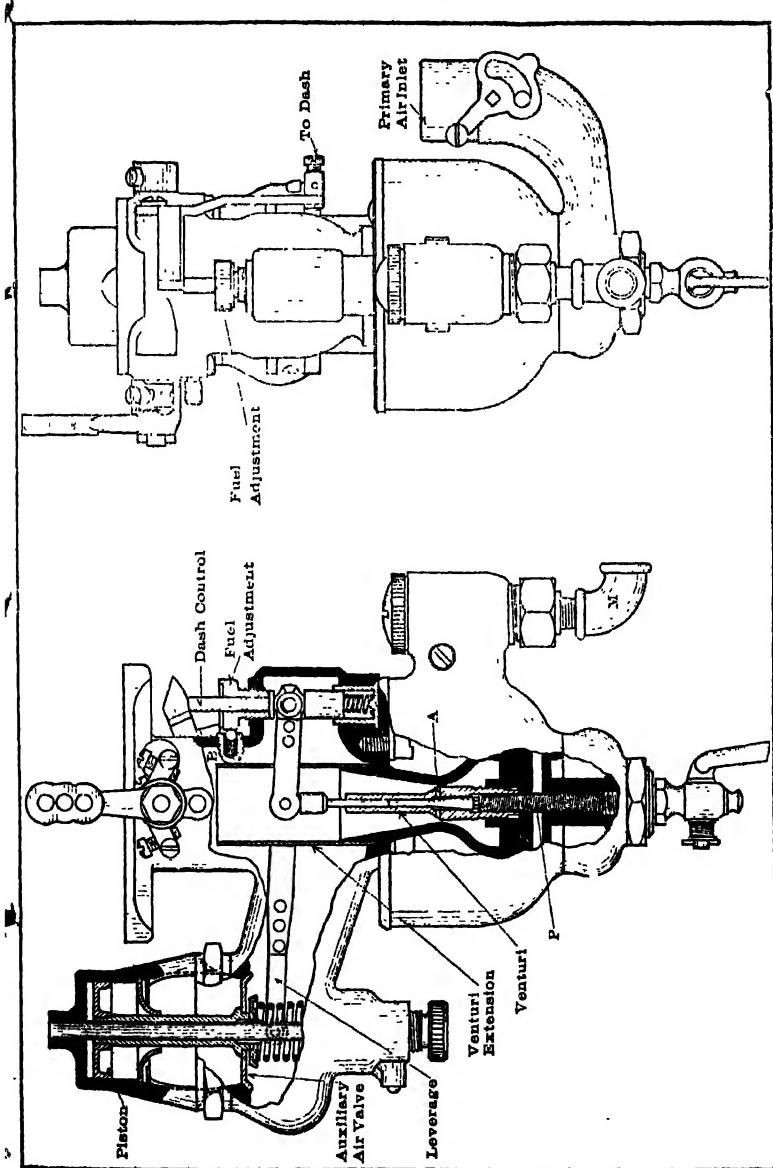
Views Showing 1916 Model Schebler Carburetor Having Mechanical Interlock Between Air Valve and Fuel Regulating Needle, also Dashpot to Prevent Air Valve Fluctuation.
